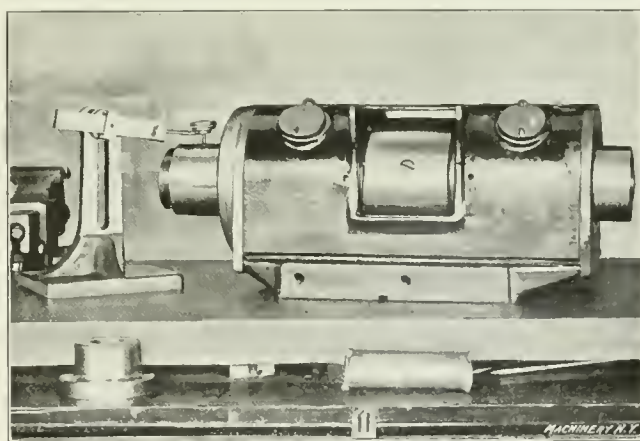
Testing Wheel Spindle for Parallelism with Base
